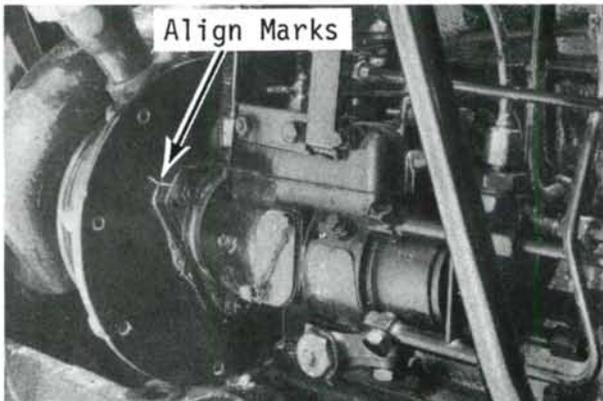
On four-cylinder engines, injection pump is properly timed to engine when marks on pump flange and engine front plate are aligned.
